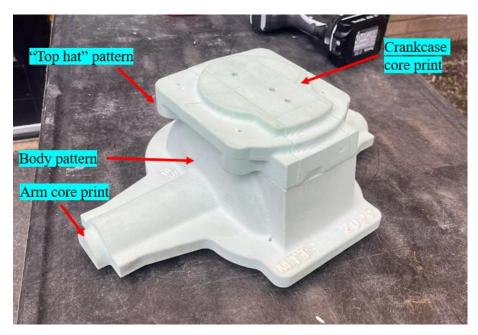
Machined upper base pattern, showing the two main sections and the core prints on the "arms" and crank case.
